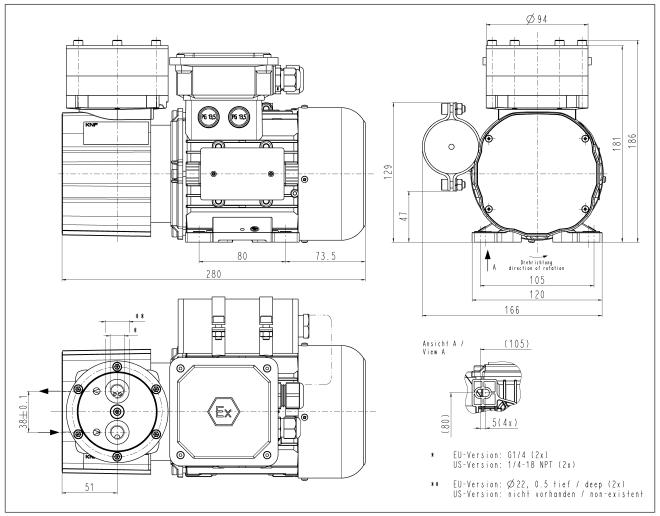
Mounting dimensions of N922FTE EX (capacitor motor)
